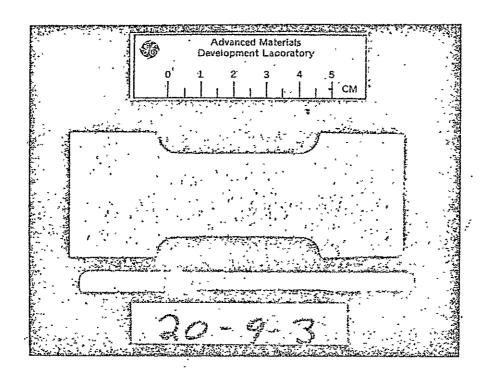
Photograph of In-Plane Tensile Specimen. (Specimen from Tile 20-9-3)
